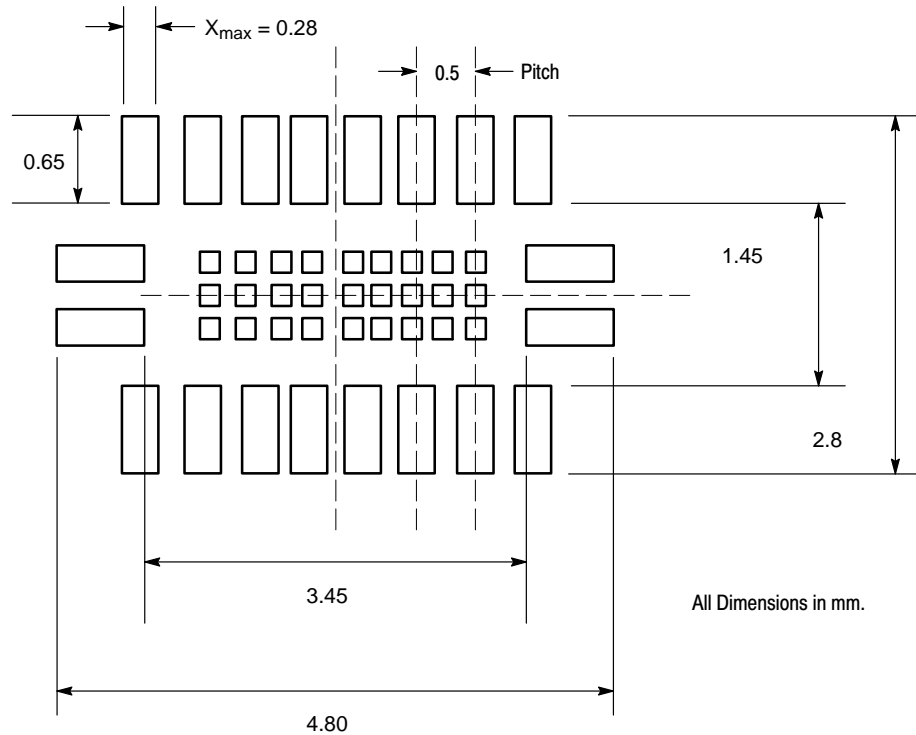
20 Pad QFN Suggested Board Layout (Bottom View)
